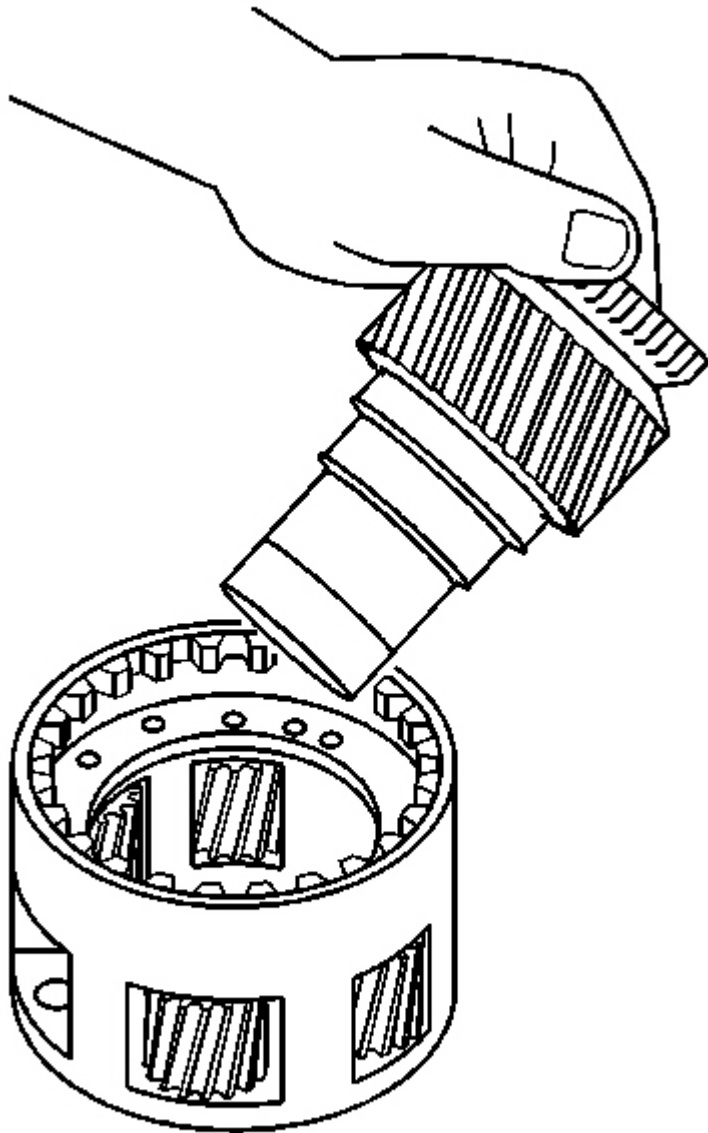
Removing Planetary Gear Large Diameter Thrust Washer
